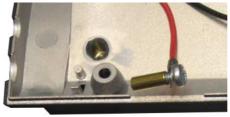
Cable ends with M4x16mm screw and brass spacer
